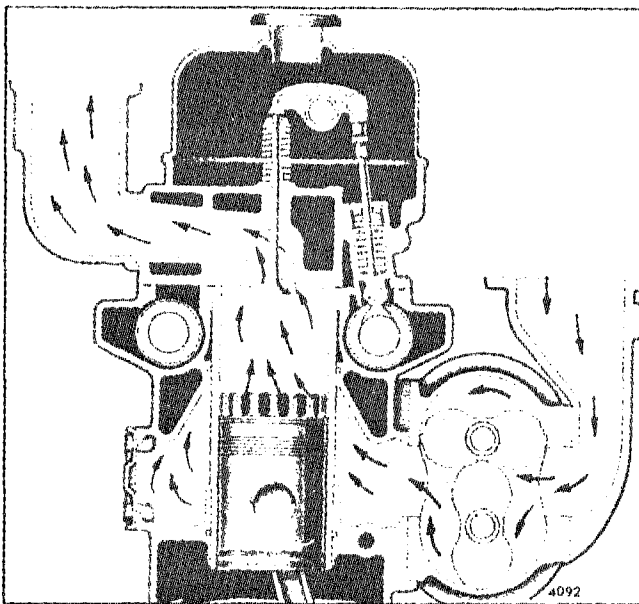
Air Intake System Through Blower and Engine (In-line Engine)
